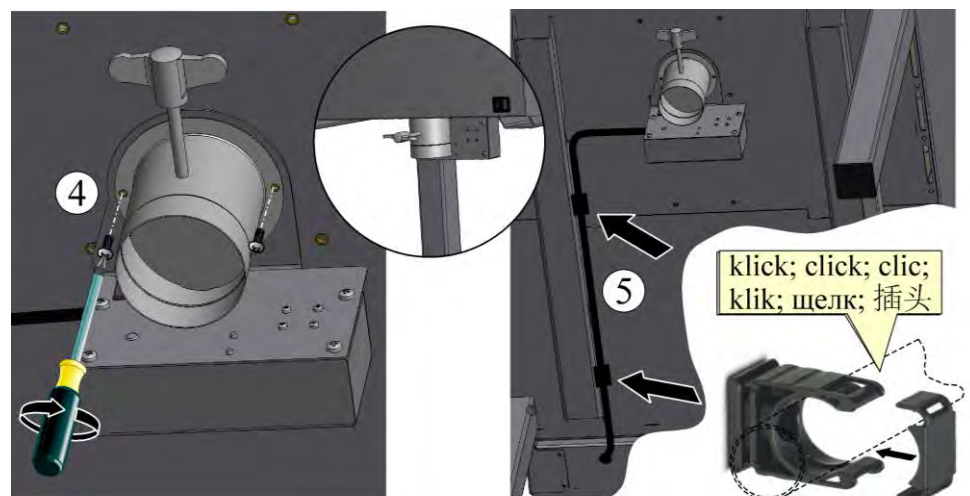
Assembling the air inlet flap and installing the cable (similar to picture)
